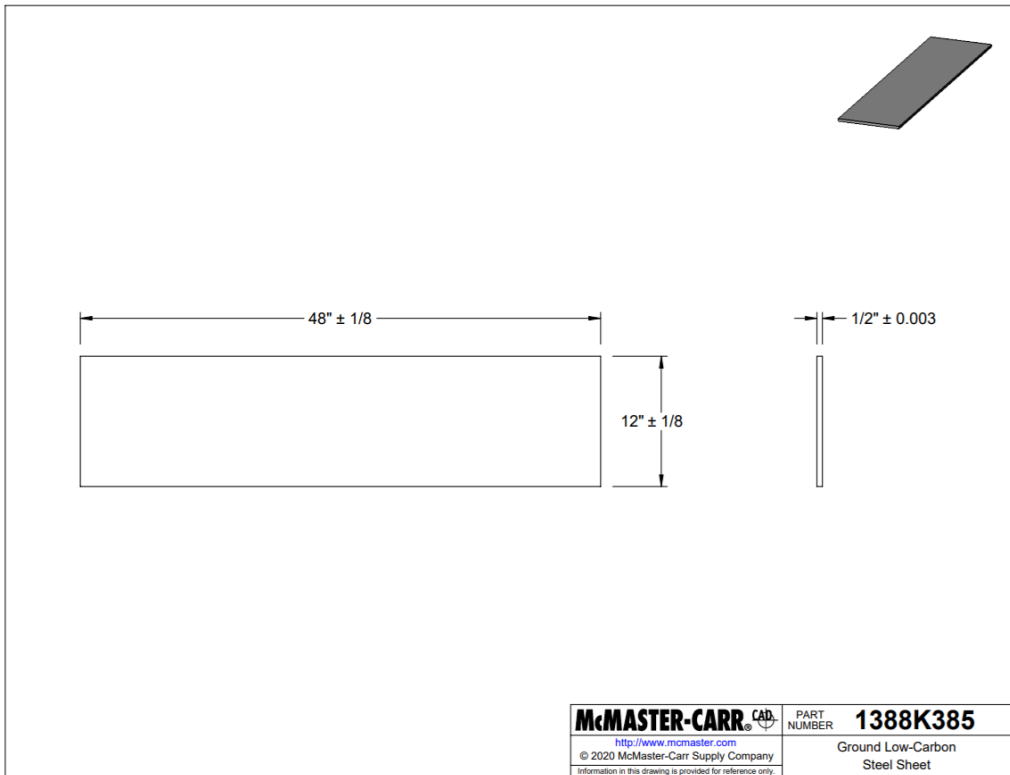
Drawing of Ground Low-Carbon Steel Sheet Used on Basket, Angular Lift, and Attachment Subsection Provided by McMaster-Carr
